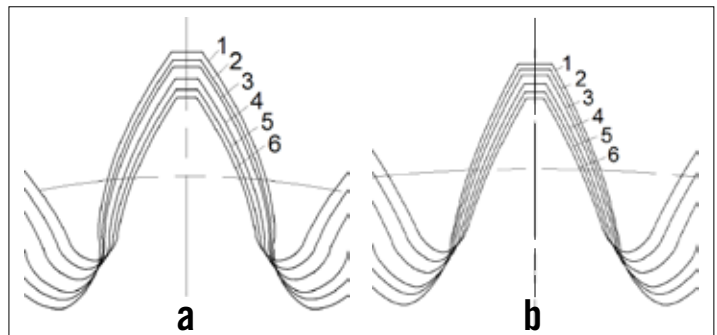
Gear profiles overlay; a – pinion tooth profiles, b – gear tooth profiles
